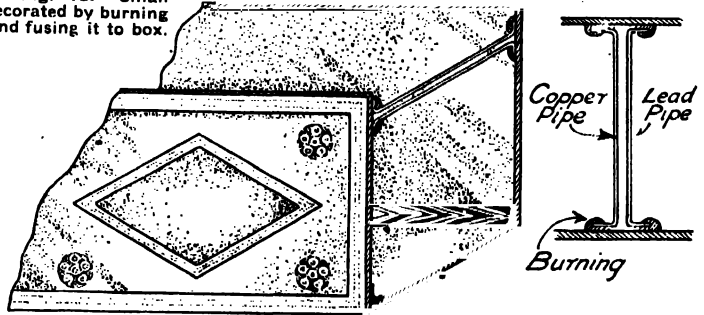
Window-box in cast lead made of panels with cast-on ornament; supported by copper tube in lead pipe, both flanged and burned to front and back of box, as shown on right.
